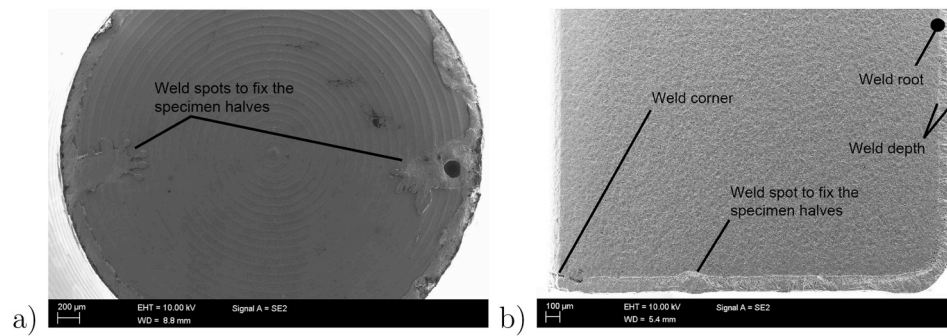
Overall SEM imaging of the weld fracture surfaces: a) standard specimen after static torque test; b) GE2 specimen after fatigue failure (crack initiation region shown).
